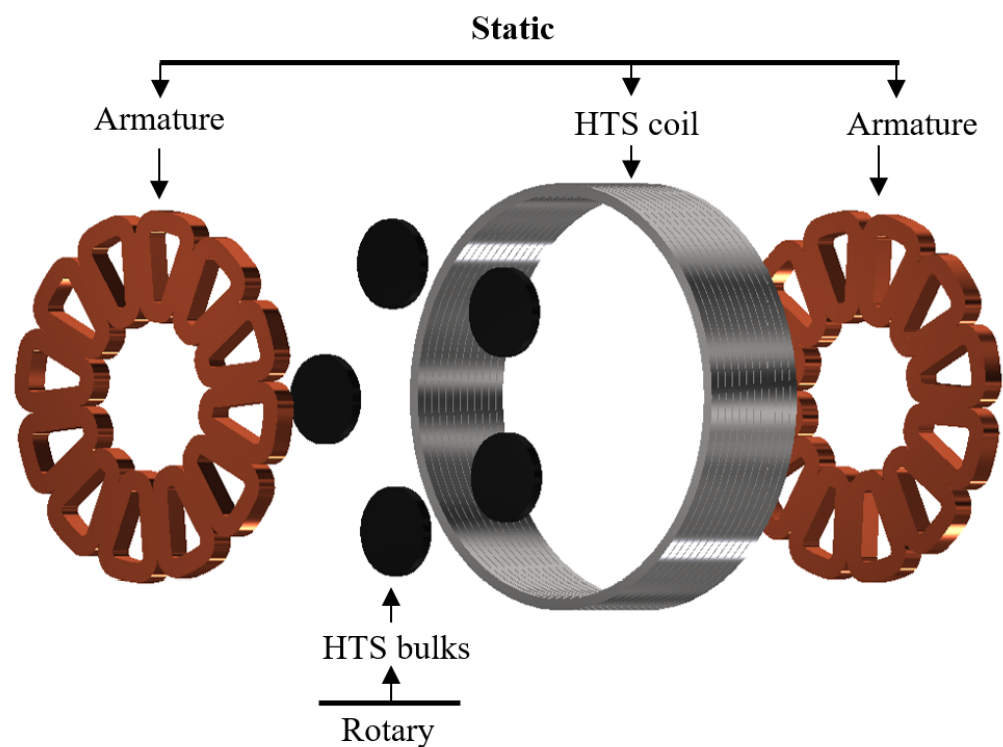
Exploded view of an axial flux modulation machine’s active components. Static parts: two copper armatures and one High-Temperature Superconductor (HTS) coil. Rotating parts: a set of HTS bulks.
